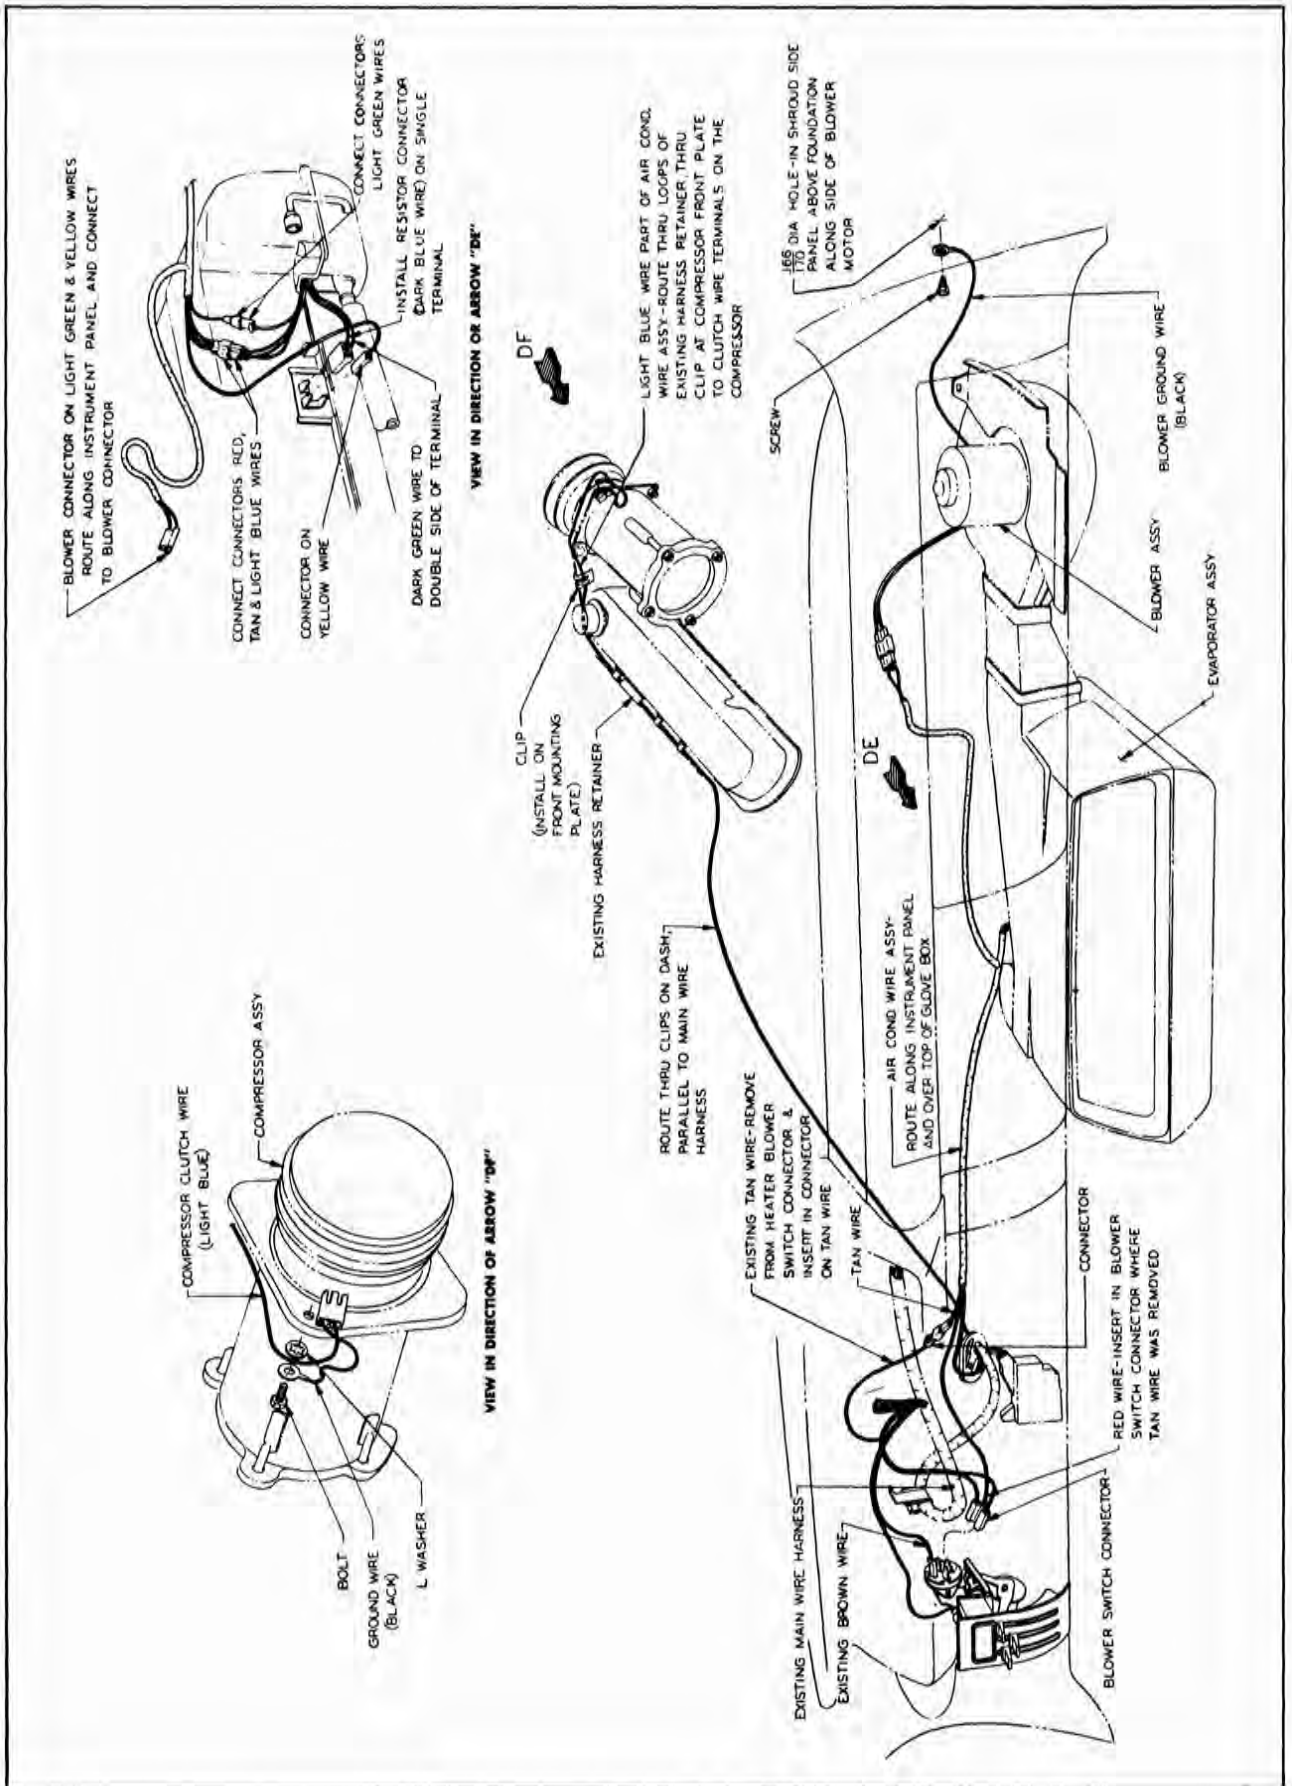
Reference Illustration—Tempest Cool Pack Electrical Parts
